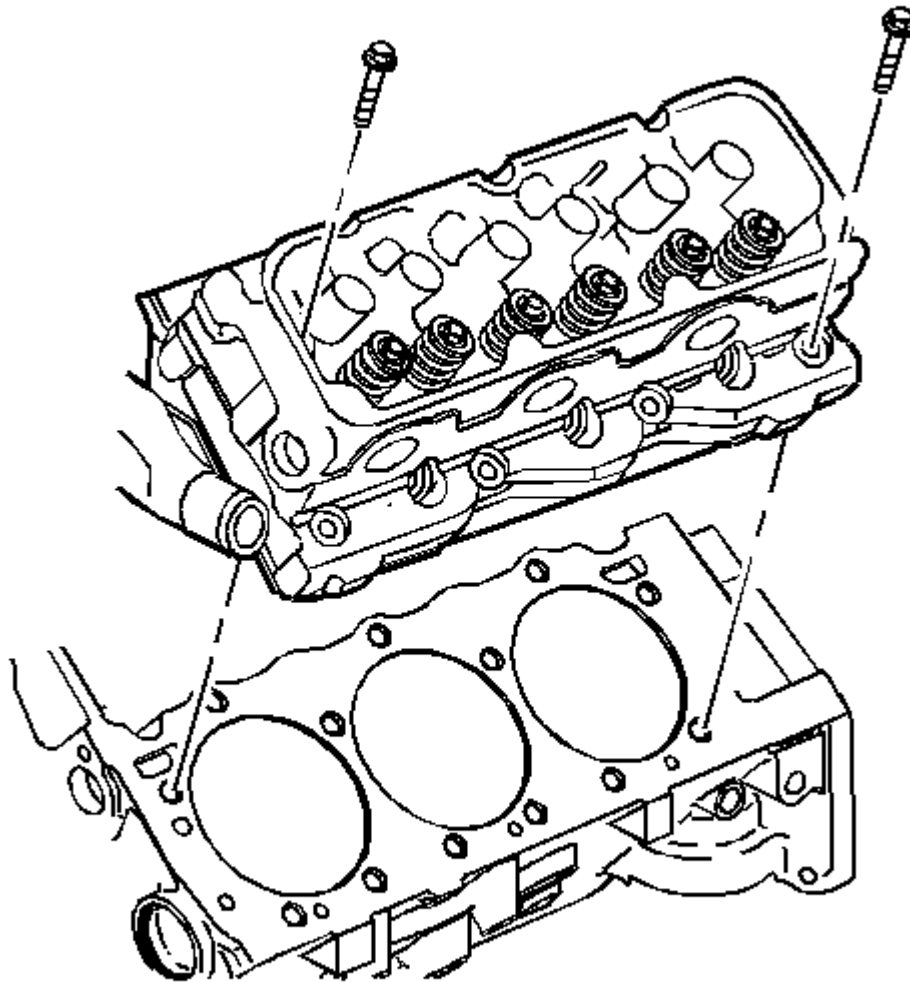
Identifying Cylinder Head & Cylinder Head Bolts
